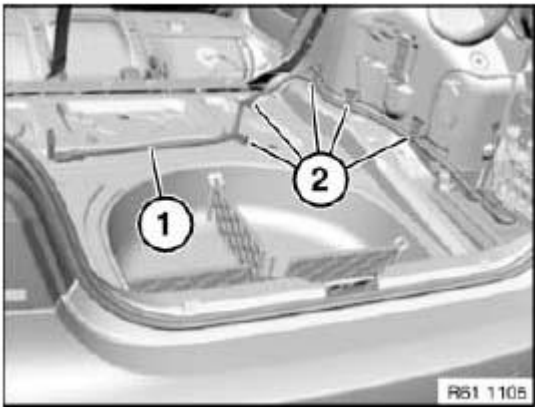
Identifying Positive Battery Cable And Cable Guides
